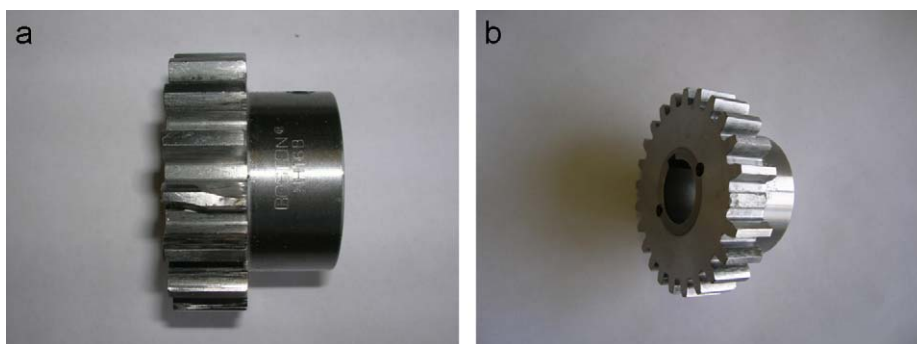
Photos of chipped and broken gears: (a) tooth chipping of gear 1' and (b) tooth breakage of gear 4'.
